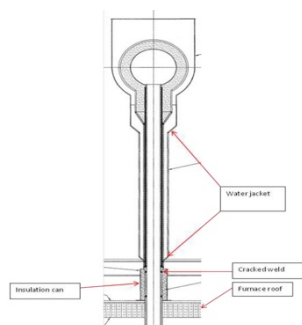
a Top section of the modified riser design illustrating the location of subsequent failures [12]
